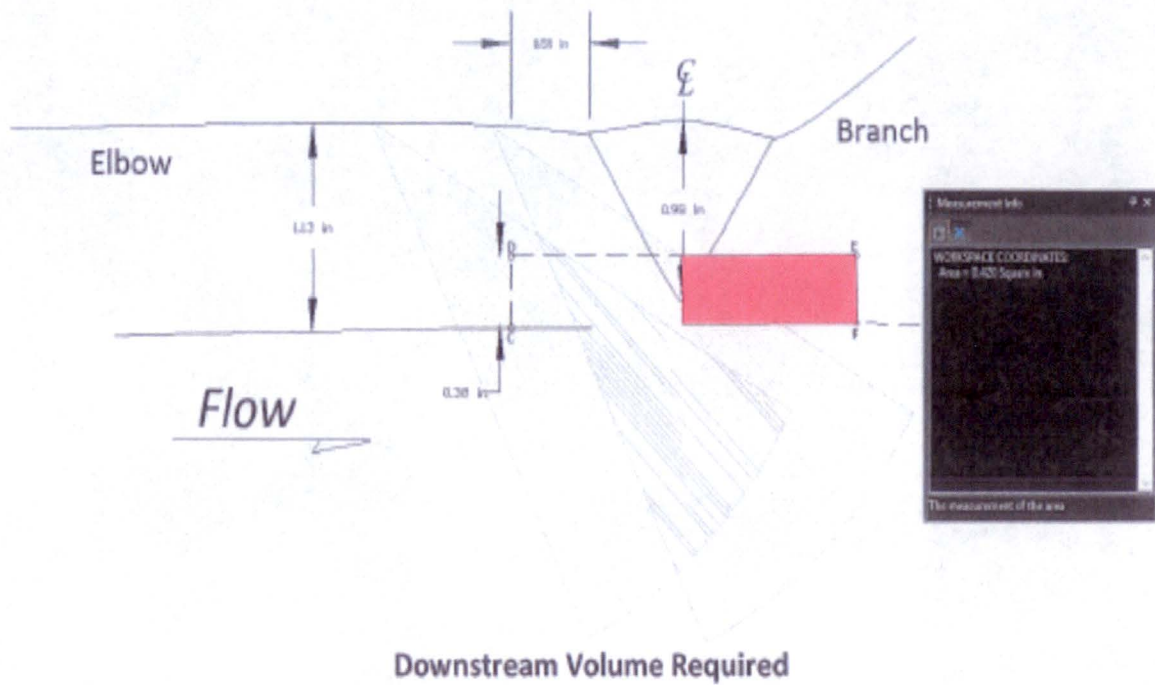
Weld 1-SI-31-27F Coverage Calculation
